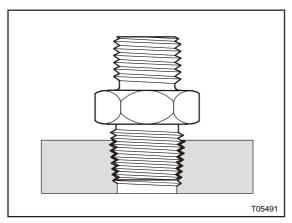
Sealing by means of tapered thread. Female thread may be parallel but must be tapered to achieve rated operating pressure.
